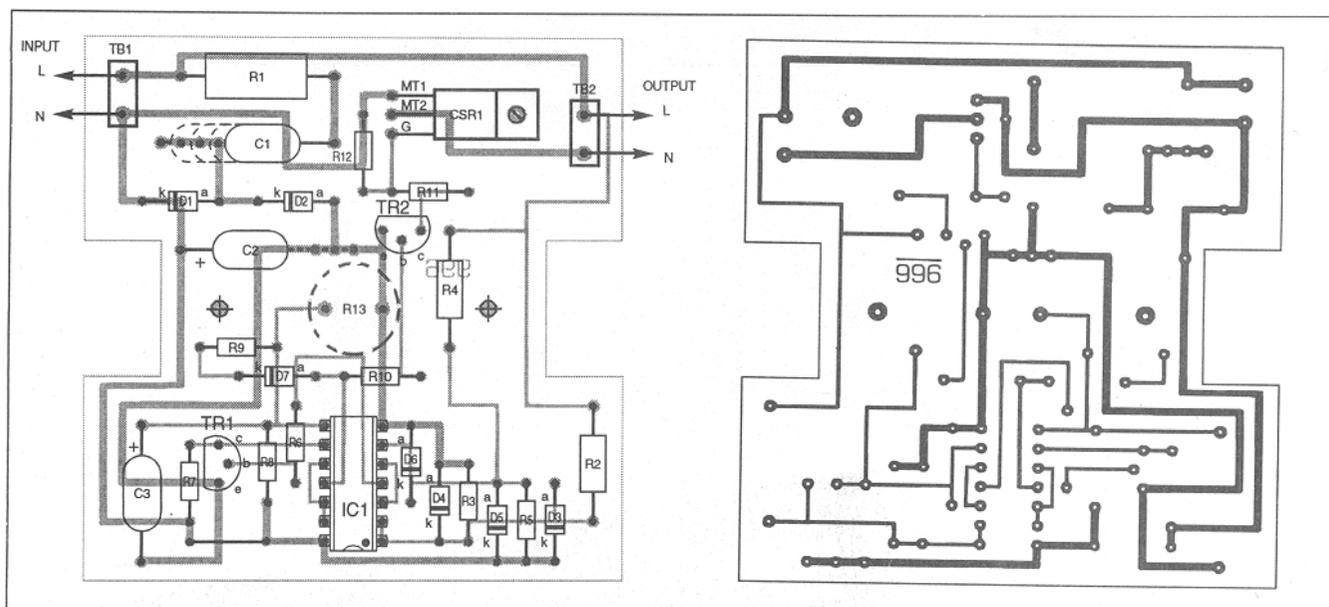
Printed circuit board component layout and full size copper foil track details. Note the l.d.r. (R13) should be mounted on the track side.
